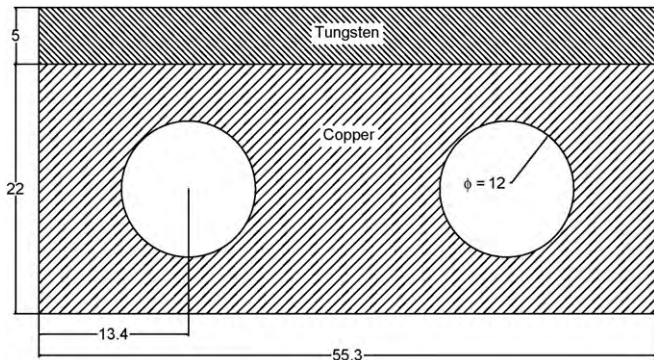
Flat-tile divertor scheme (dimensions in mm).
